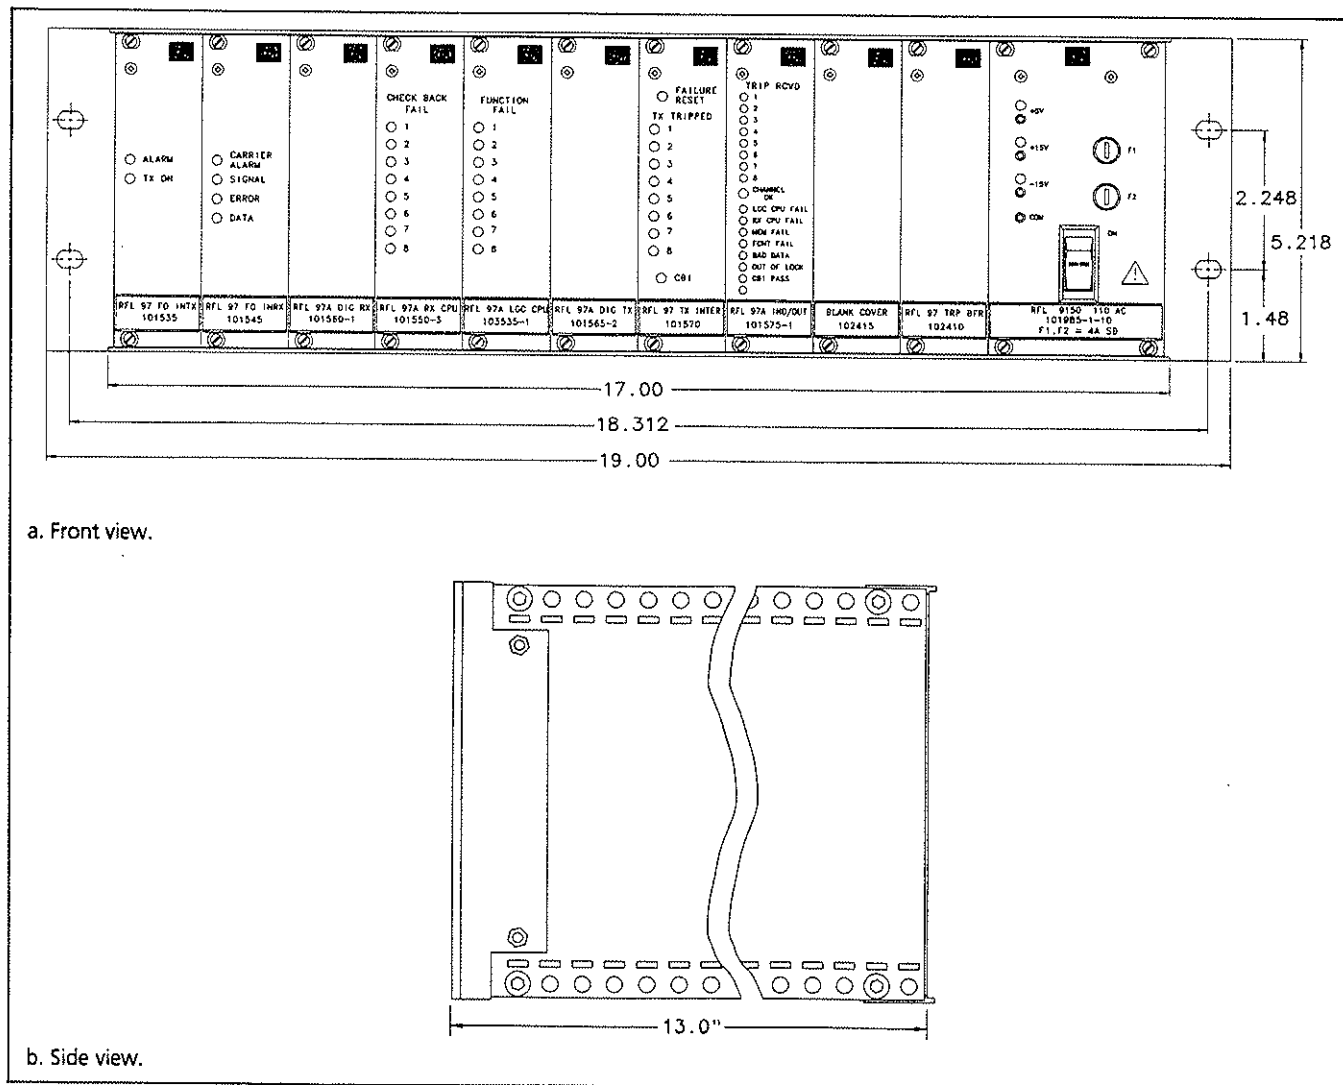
Mounting dimensions, RFL 9700 Digital Protection Channel
